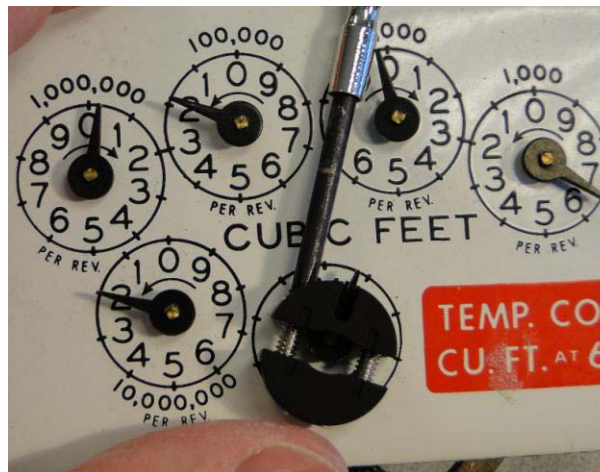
12. Thread Screws into Bottom Wheel Half
